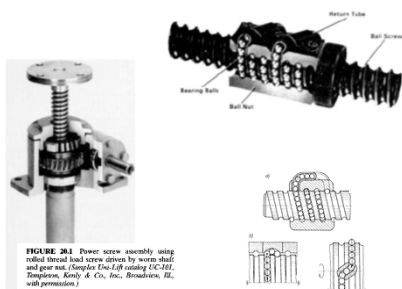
Power screw assembly using rolled thread load screw driven by worm shaft and gear nut. (Simplex Uni-Lift catalog UC-101, Templeton, Kerby & Co., Inc., Broadview, Ill., with permission.)
